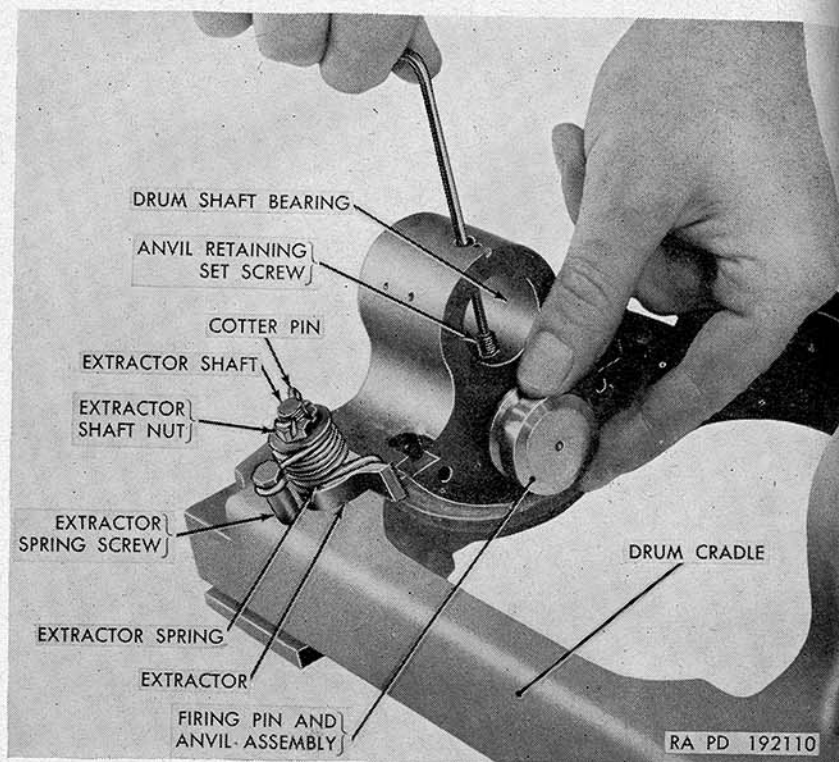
Removal of firing pin and anvil assembly from drum cradle.
